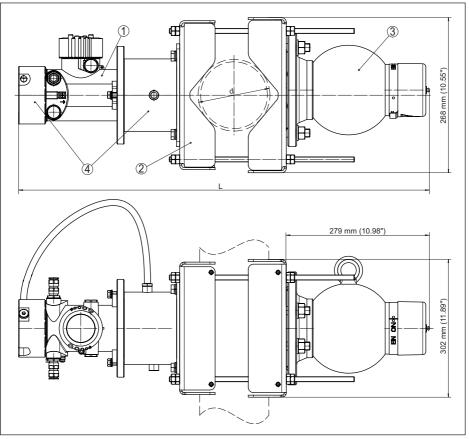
Mounting bracket with horizontally mounted sensor and water cooling (with VEGASOURCE 31, 35)
